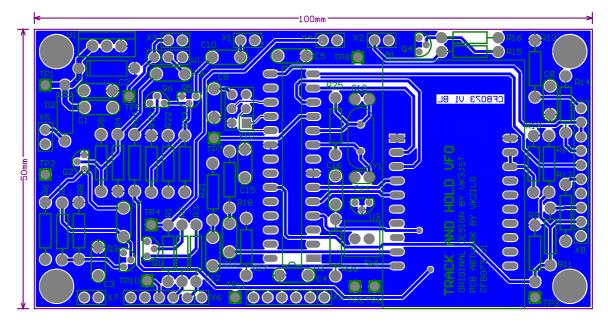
Printed circuit board CFB073 V1 bottom layer (blue) (viewed through board)
